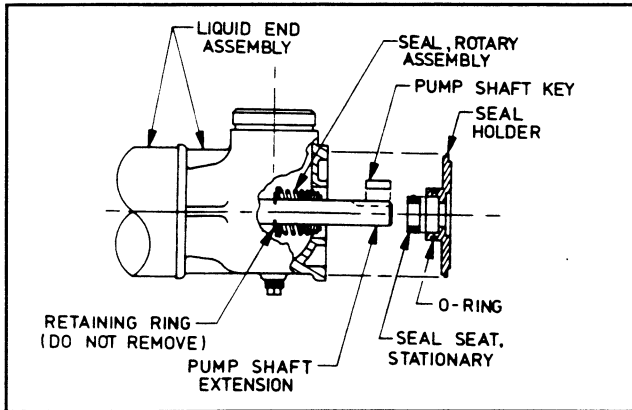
REMOVAL OF MECHANICAL SEAL
